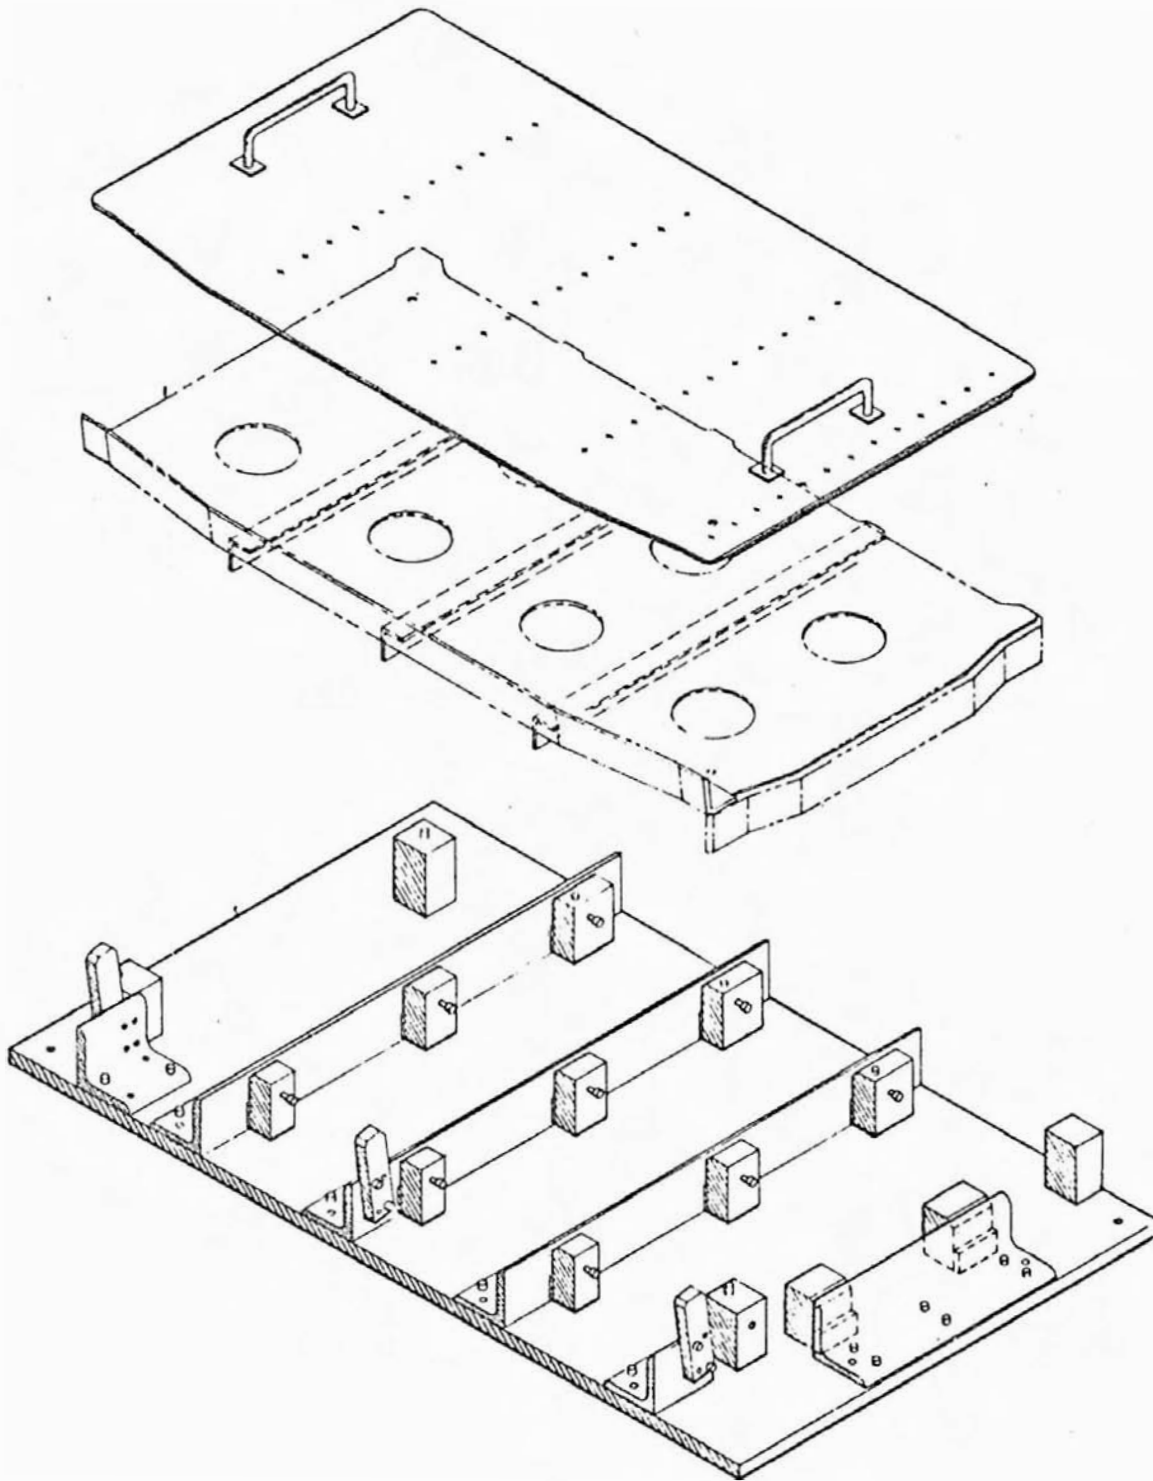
Intermediate Ring Assembly Support Fixture SF-335-19110
